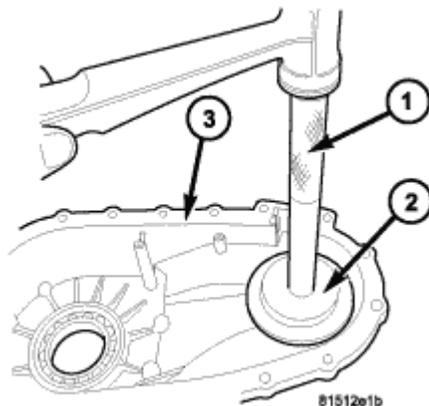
Using Installer 7829A And Handle C-4171 To Remove Front Output Shaft Bearing From Front Case
